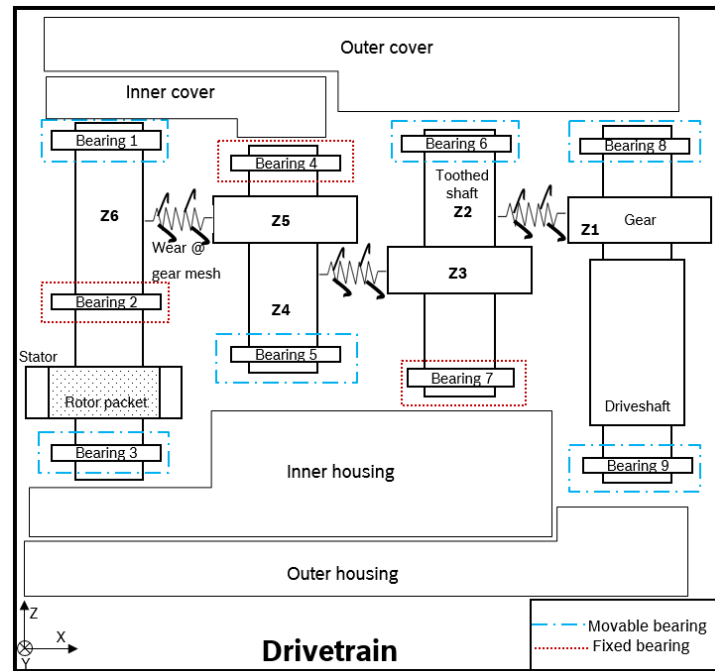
Drivetrain layout with wear among the gears and toothed shafts
